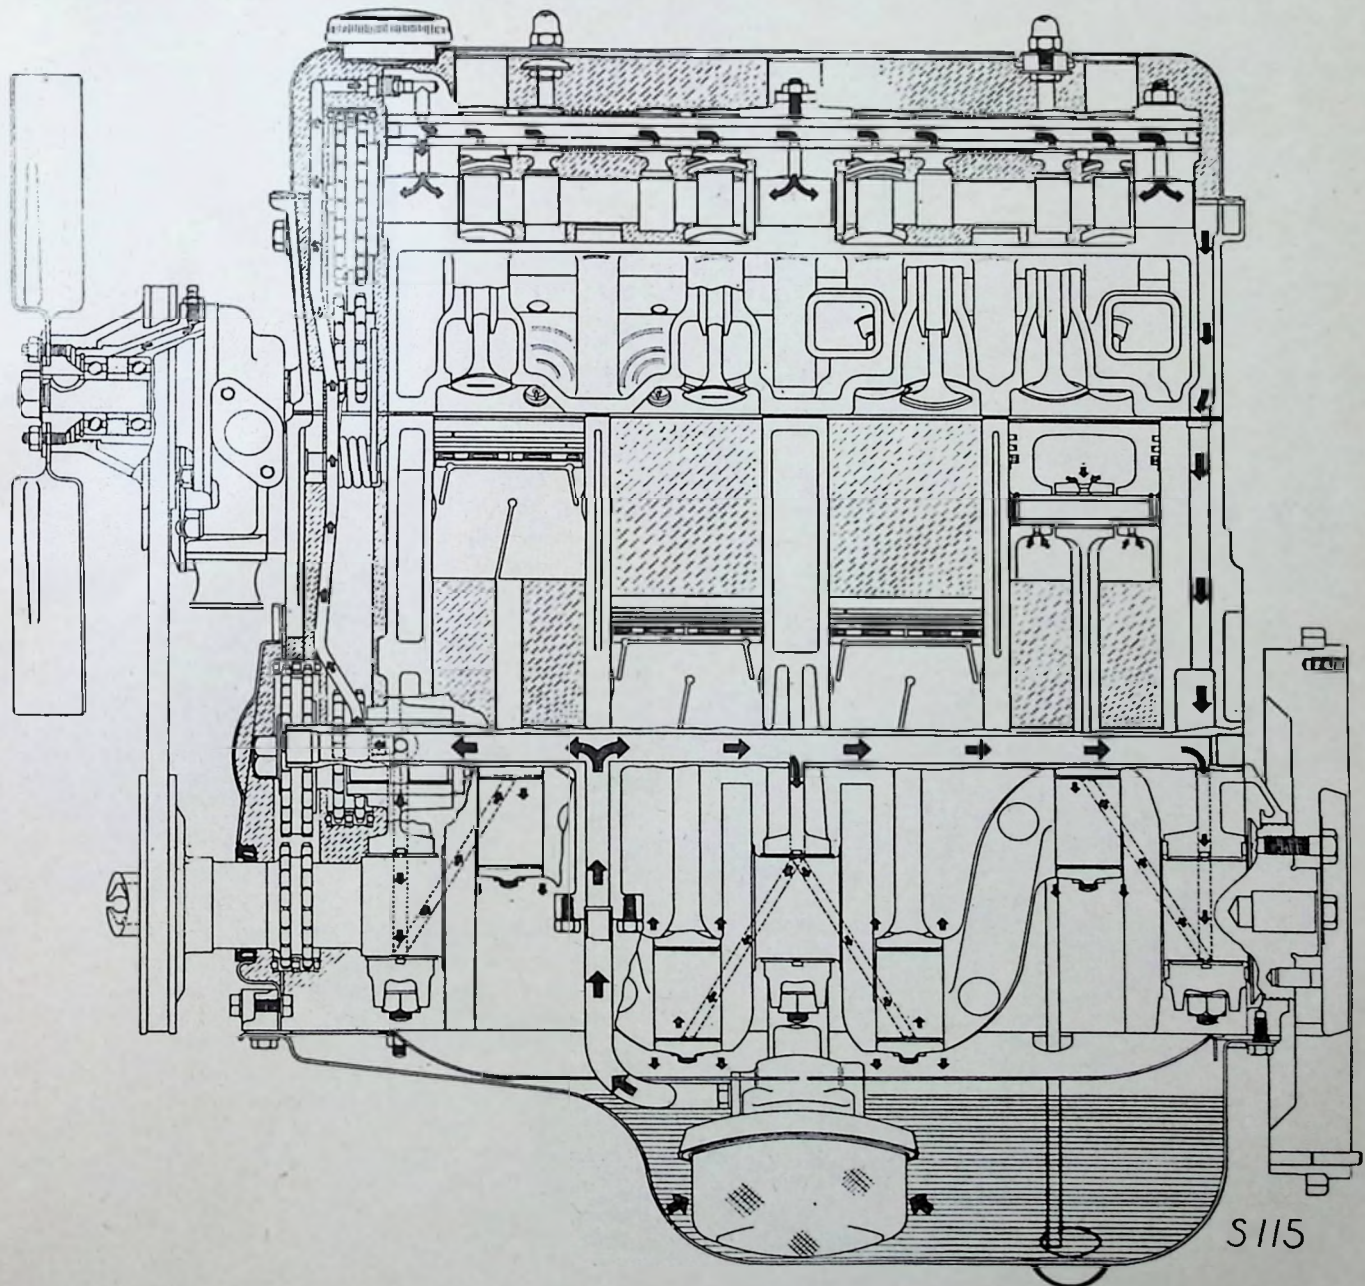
Engine lubrication, longitudinal section, Series I-II.
